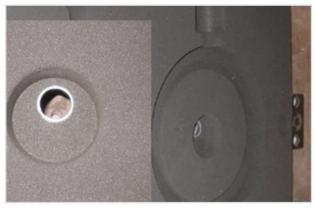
Moulding results on a generic plate casting with collapsible metal breaker core
